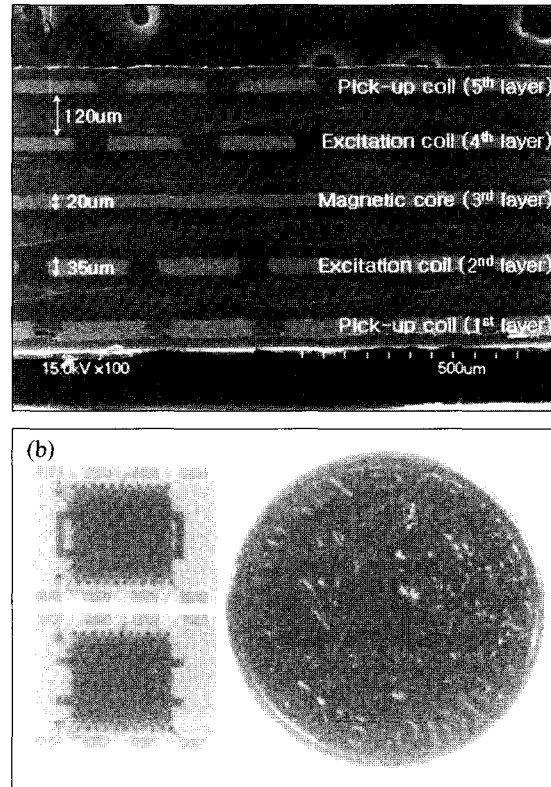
SEM photographs of the micro fluxgate sensor fabricated by the new printed circuit board (PCB) technology. (a) Cross-sectional, (b) plan view of the sensor with rectangular-ring shaped and two bars shaped core.
